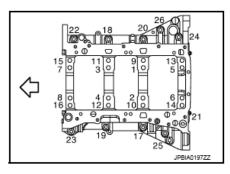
Lower Cylinder Block Bolt Tightening Sequence Courtesy of NISSAN NORTH AMERICA, INC.
